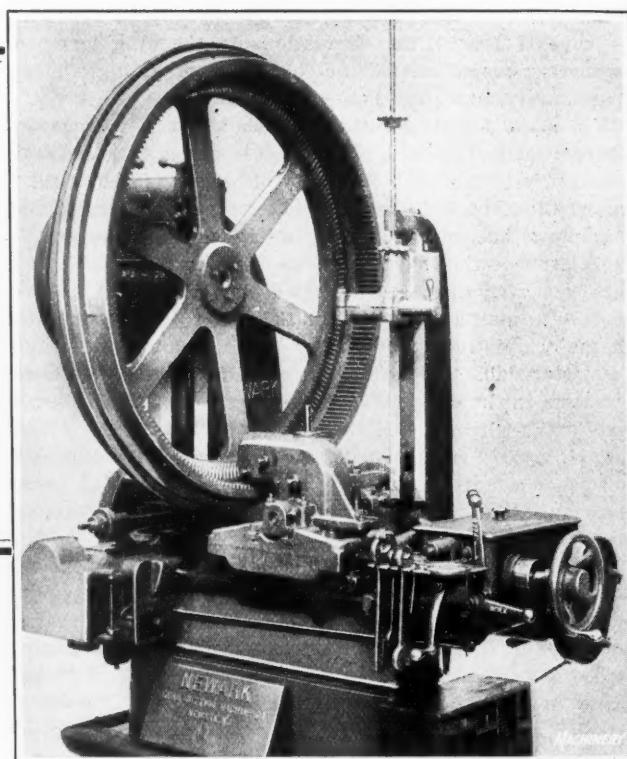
Cutting an Internal Gear on a Machine equipped with an Internal Attachment
